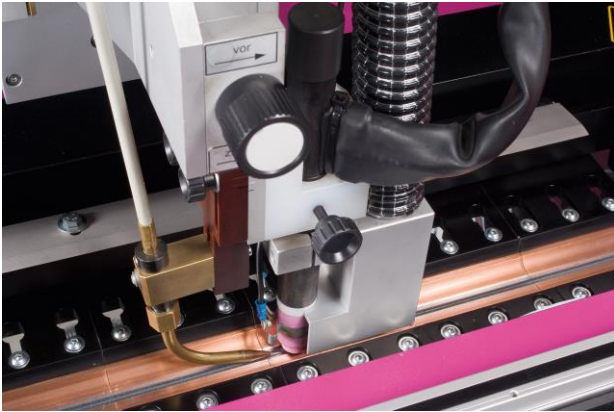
Weld fume extraction (for welding galvanized steel)
